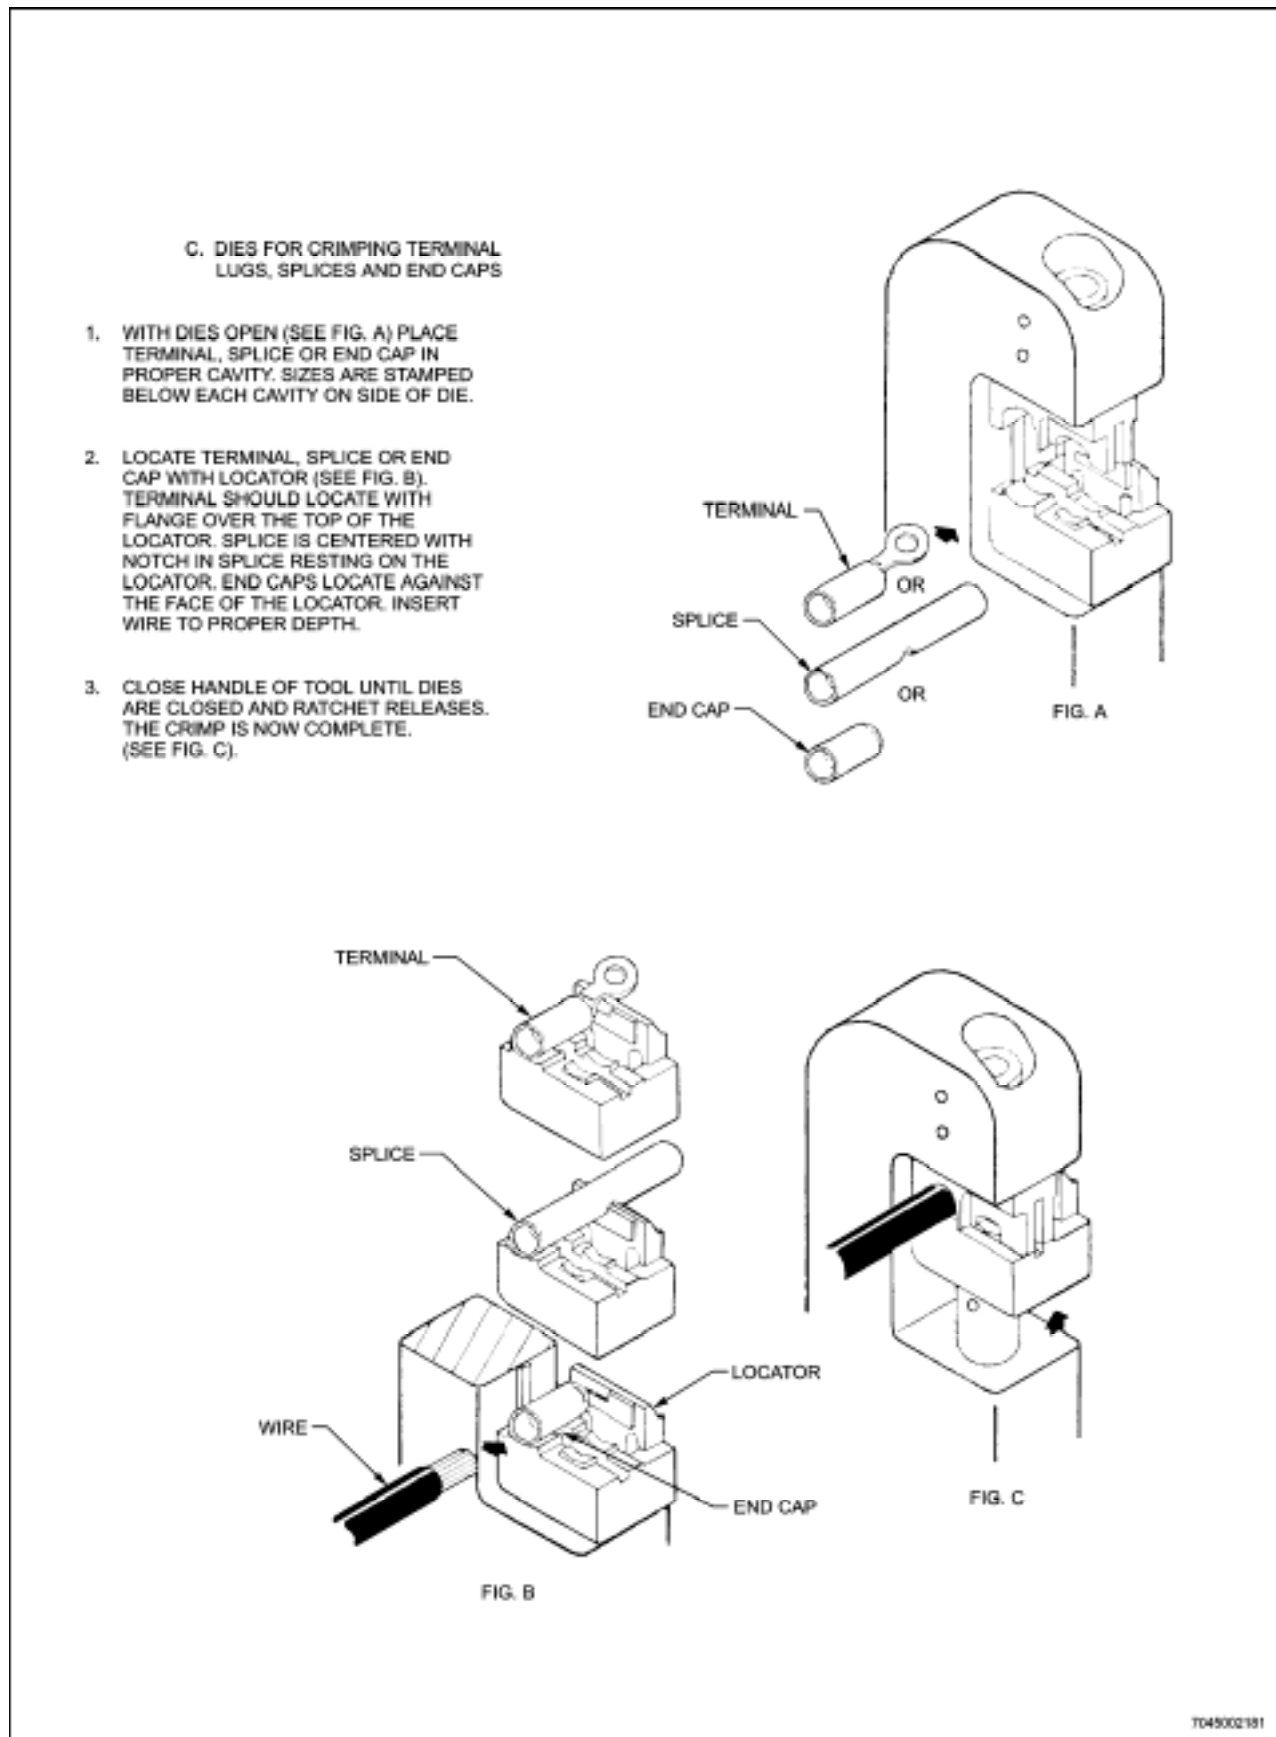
Crimp Tools and Dies (Sheet 2 of 2)
